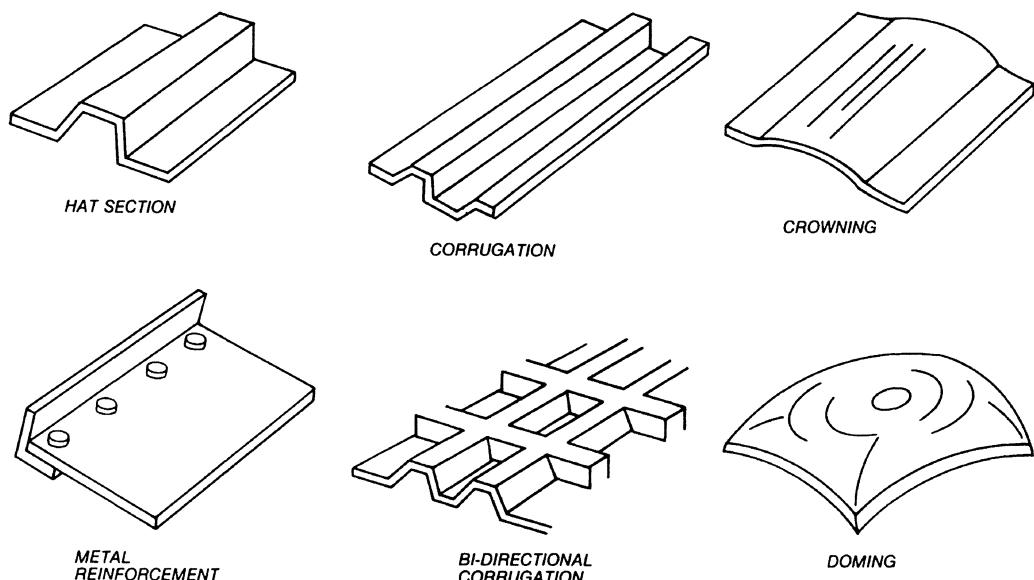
Examples of geometric structural reinforcement techniques.
